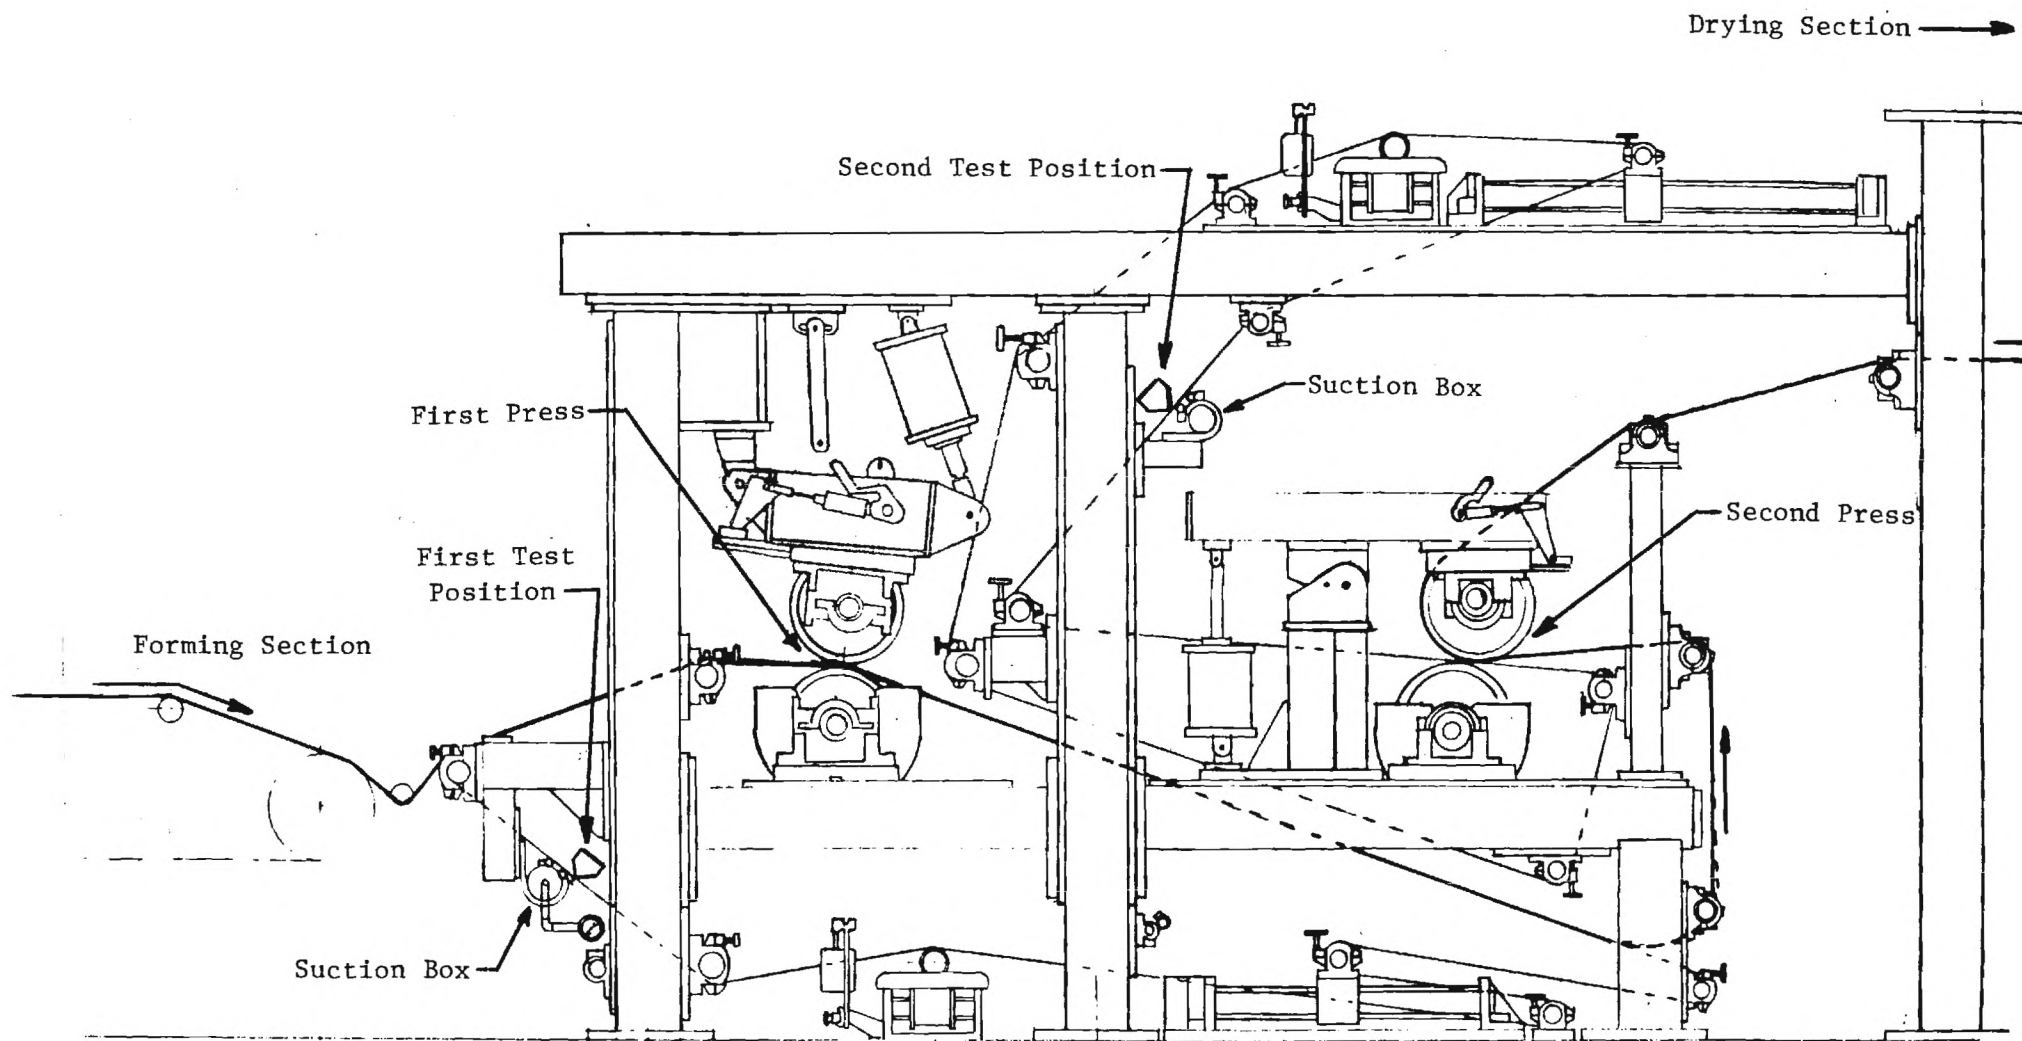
Press Section, Herty Foundation Pilot Plant Paper Machine
